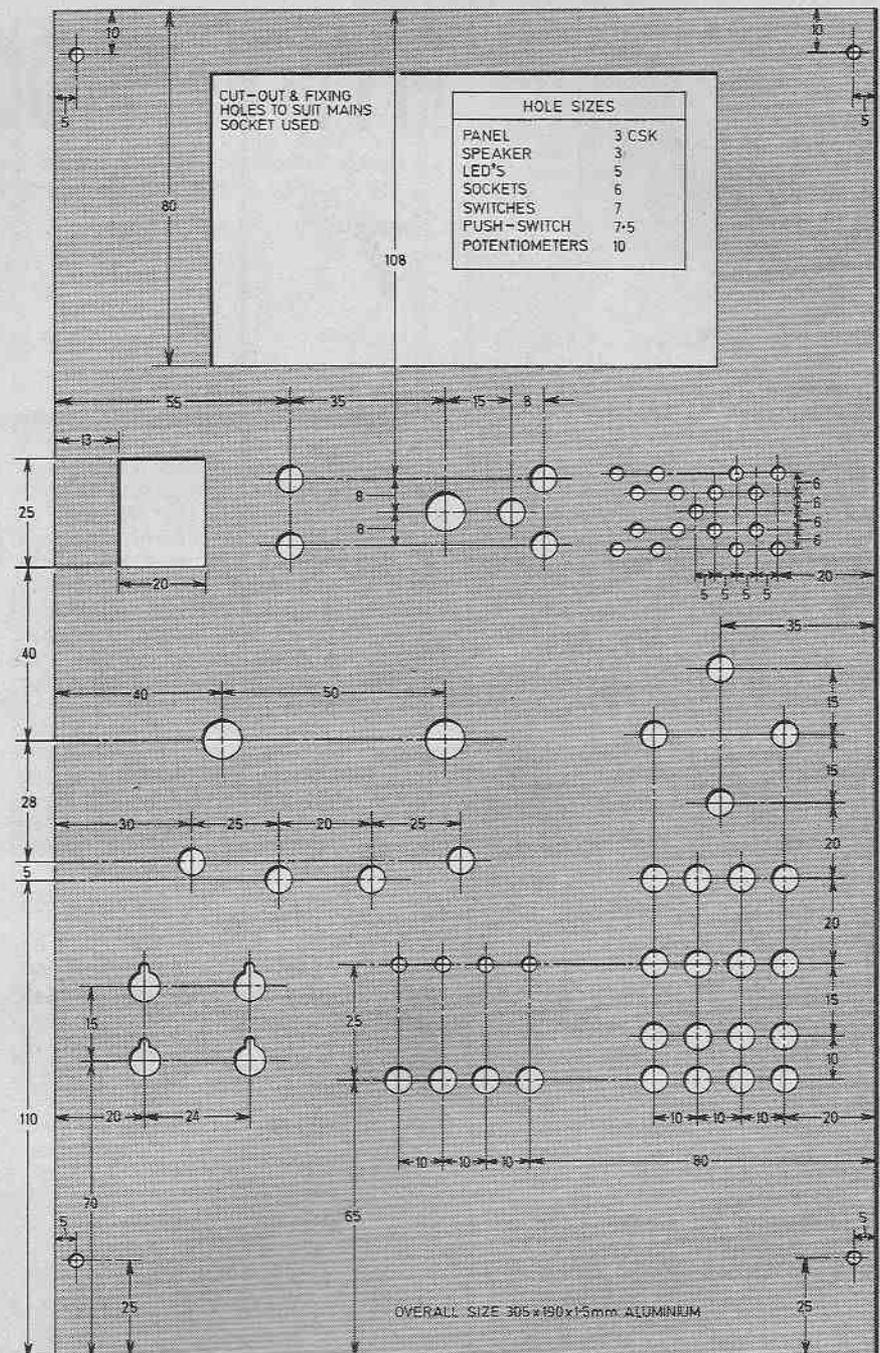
Complete drilling details for the top panel of the Console. Dimensions in mm.
